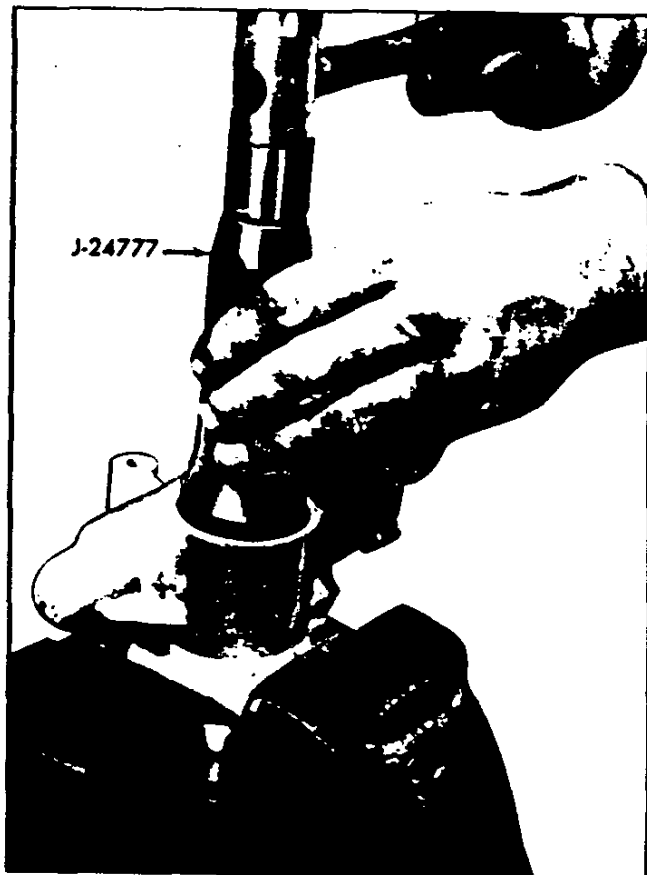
Installing Distributor Drive Housing Seal with J-24777
